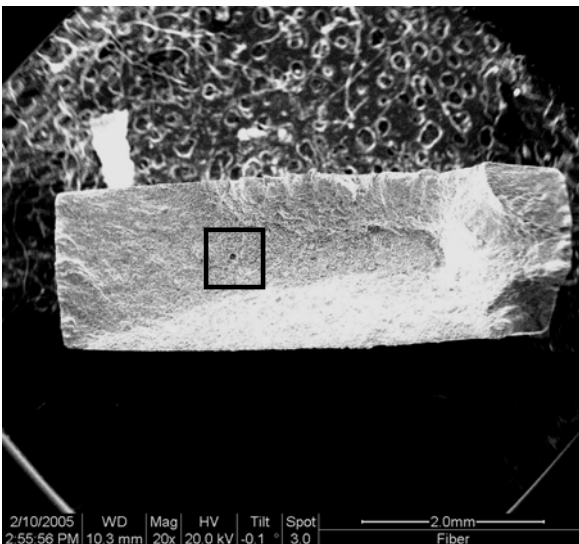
Specimen Ti-07, overall view of fracture surface
